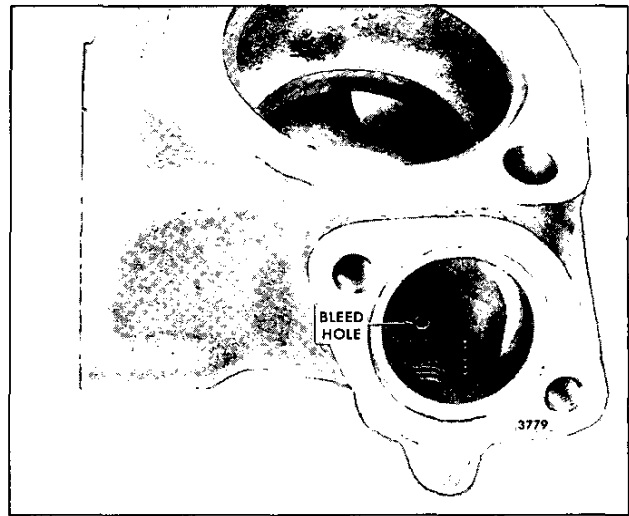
Bleed Hole in Thermostat Housing (V-Type Engine)
